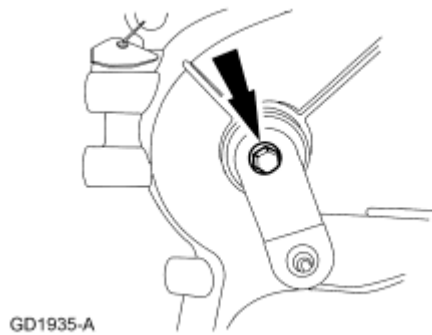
Manual Control Lever Outer Assembly & Bolt
